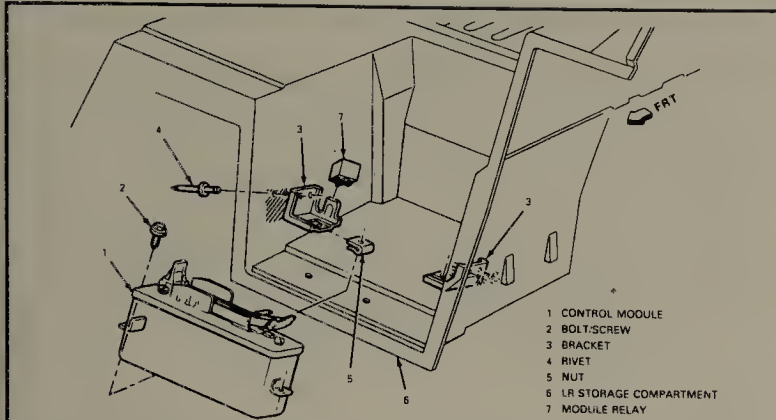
Exploded view of the control module mounting—1986-89 vehicles
